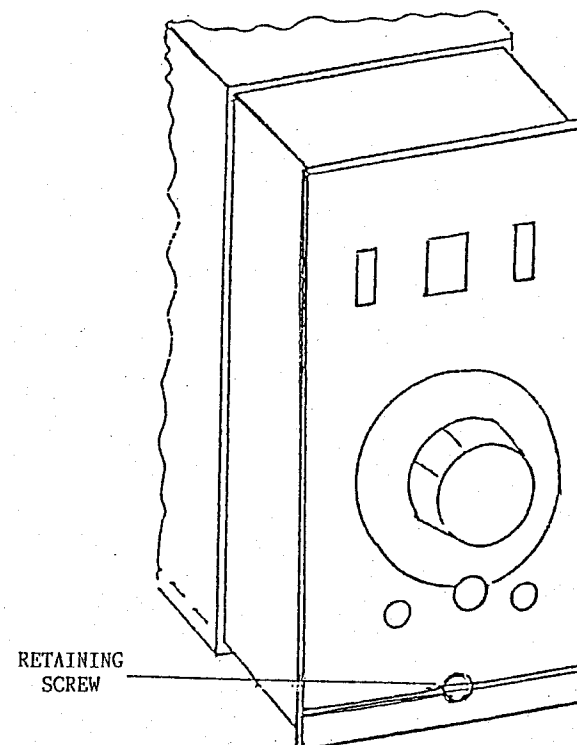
REMOVAL AND REPLACEMENT OF 3077 WITHIN HOUSING
